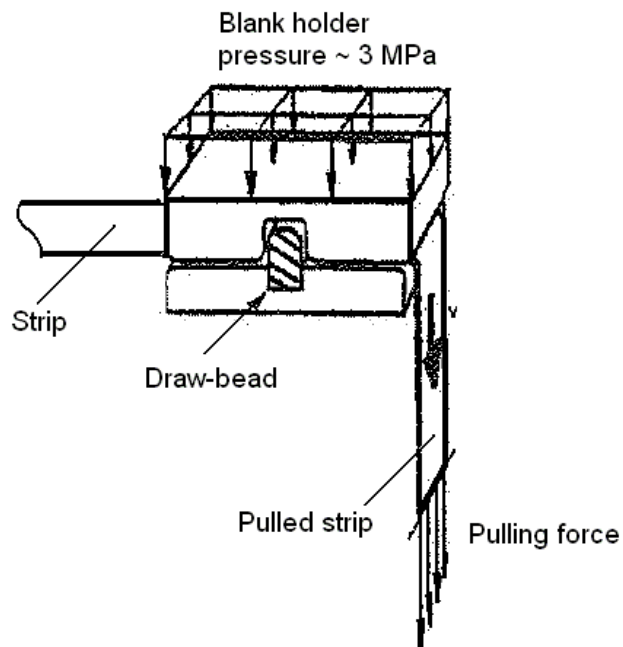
Strip drawing through draw-bead test [After Schedin, 1994]
